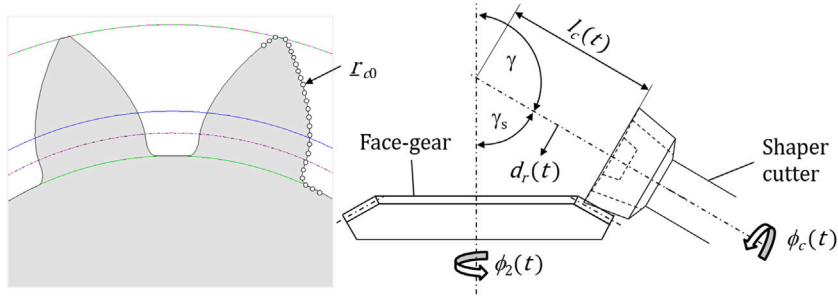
Left: Discretization of the tool cutting edge; right: Shifting the tool according to the stroke position.
